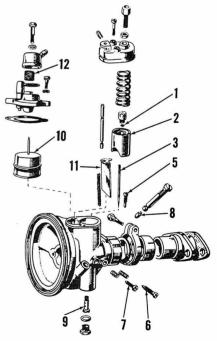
Exploded view of Del'Orto ME type carburetor typical of all models except KL50.
